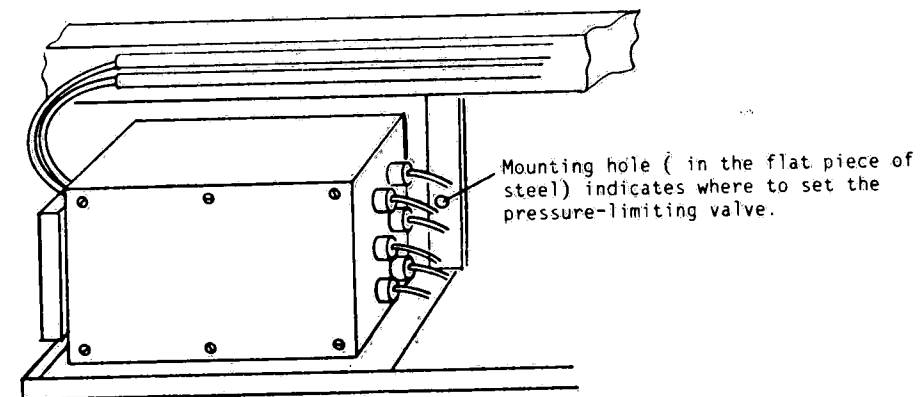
ADJUSTING PRESSURE LIMITING VALVE.
